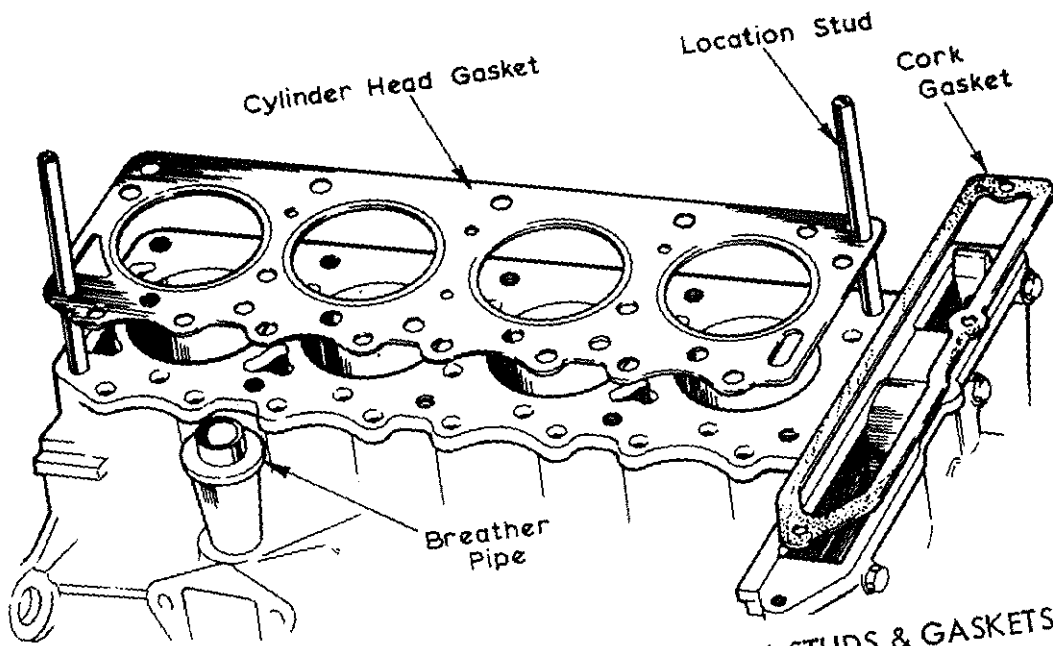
CYLINDER HEAD LOCATION STUDS & GASKETS
